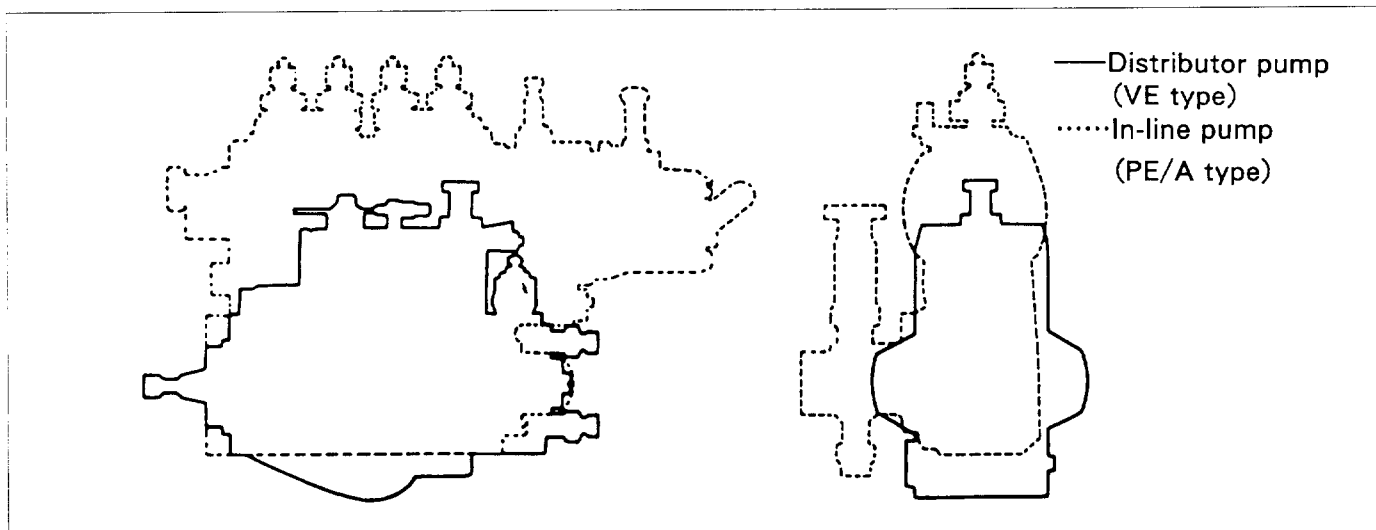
Comparison of dimensions of Distributor and In-line pump
